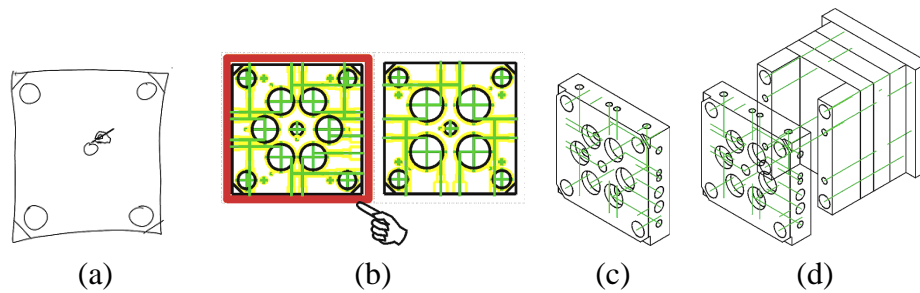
Retrieving a mould component and integrating it into a drawing.
